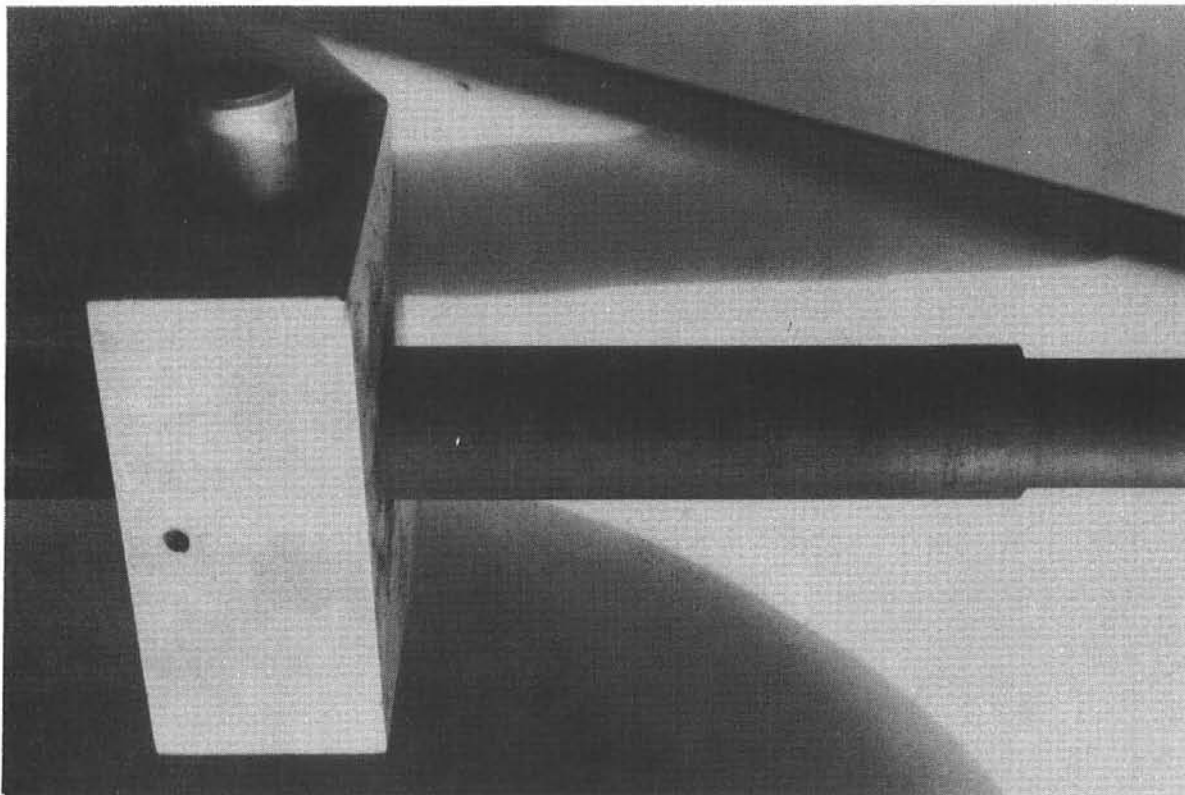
MDAC Trunnion Block and Elevation Jack Shaft after Test
